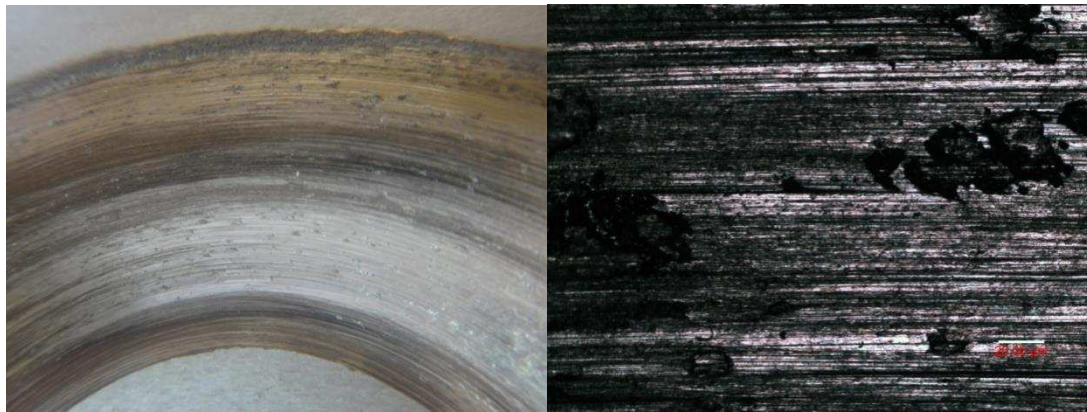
Wear on tool tips: (a) Rigid tool (b) Water cooling tool
